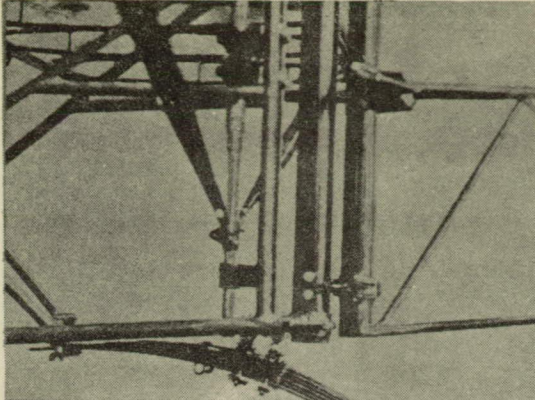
Welded steel tube construction is employed in the tail unit of the "Avro Trainer" airplane. The tail skid is a leaf spring, carrying a chilled cast iron shoe.
